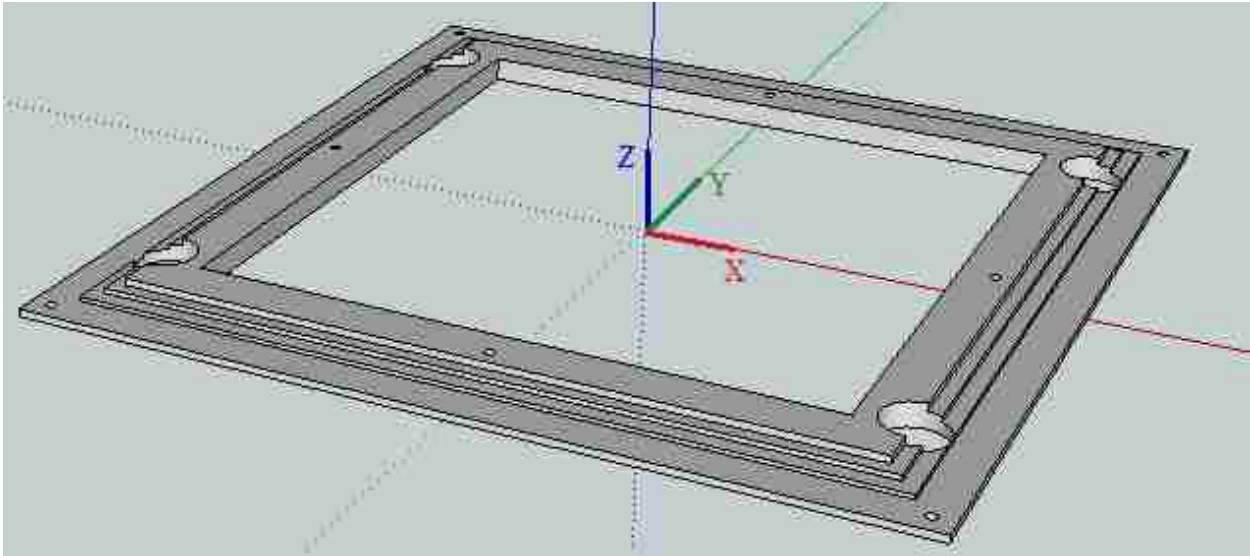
Top orthogonal view of the 20x20 cm² lower trimmer lead plate.
